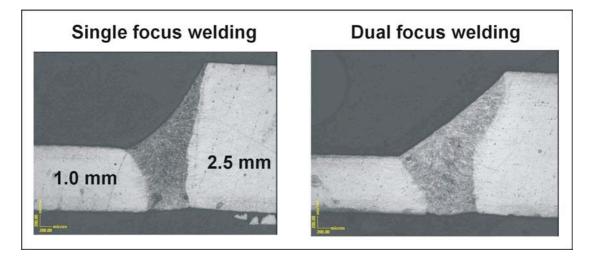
Effect of beam focusing optics on weld seam cross section in CO₂ laser welding
